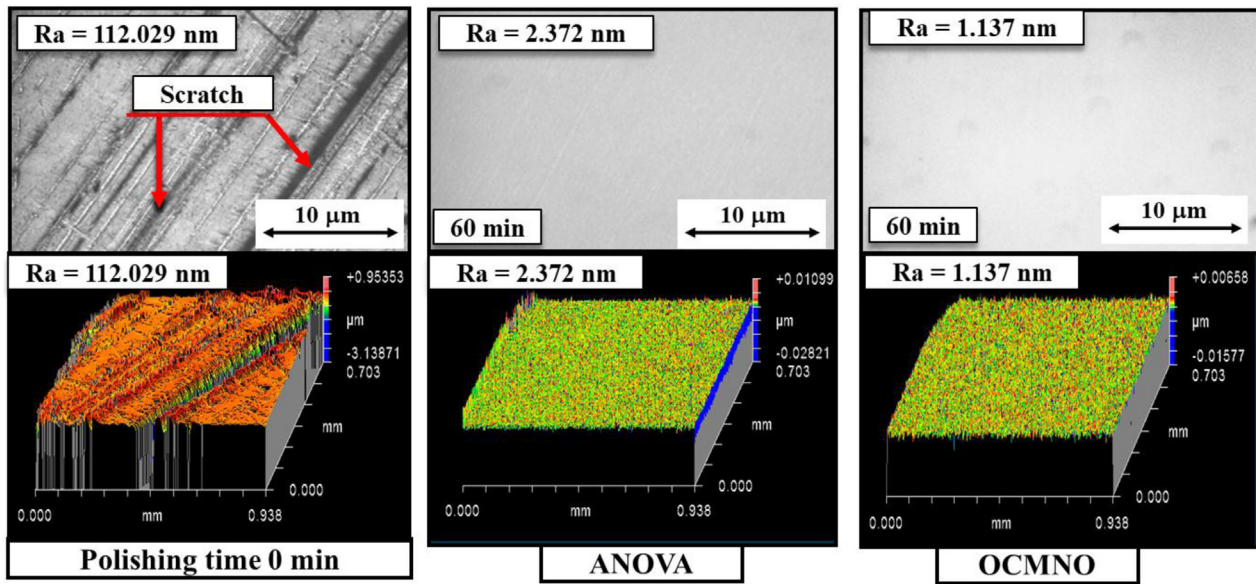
Morphology of some workpiece surface SKD 61 coated Ni-P before and after polishing.
